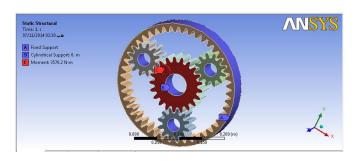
Boundary condition settings of the final drive of MF285 tractor for FE bending Stress analysis
